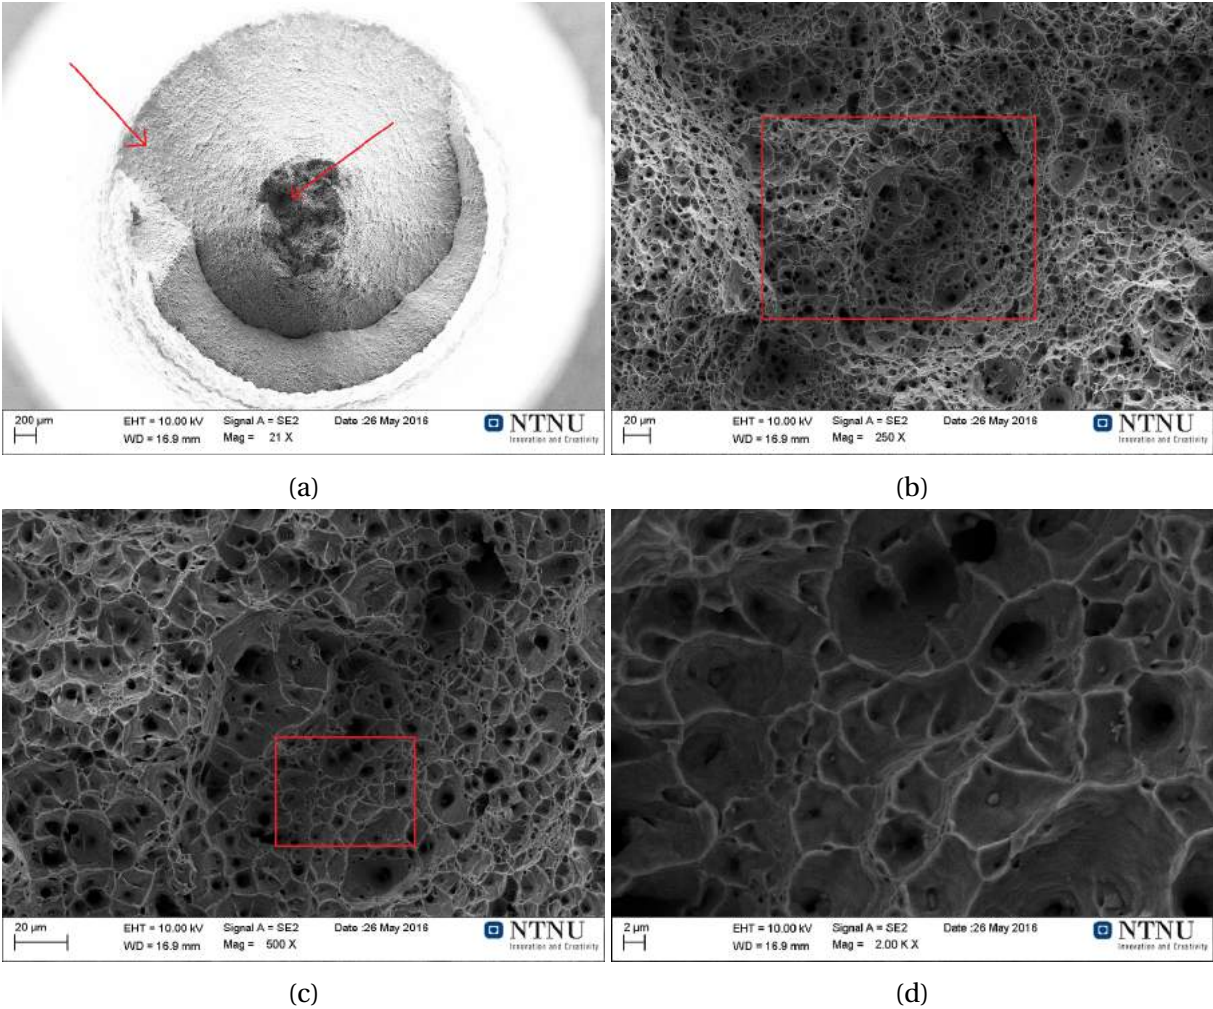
Fracture surface of conventional ram extruded Al-5%Mg.
